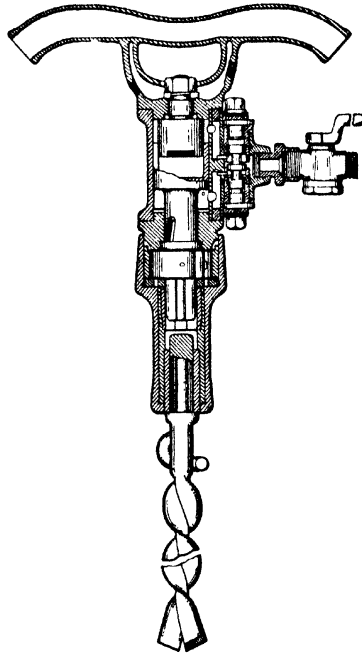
Sullivan "Auger Rotator," Class DR-33.
